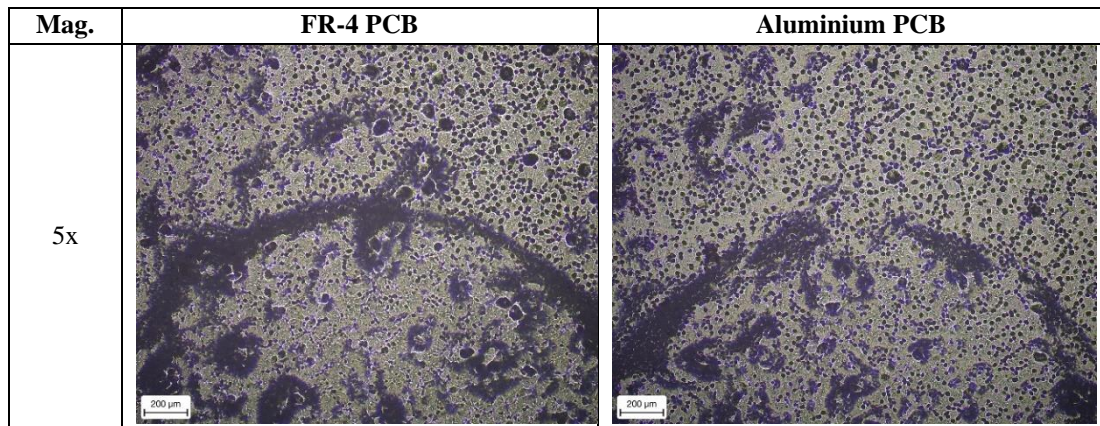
Appearance of the PU PCB samples under microscope focussing on the end of a trace
